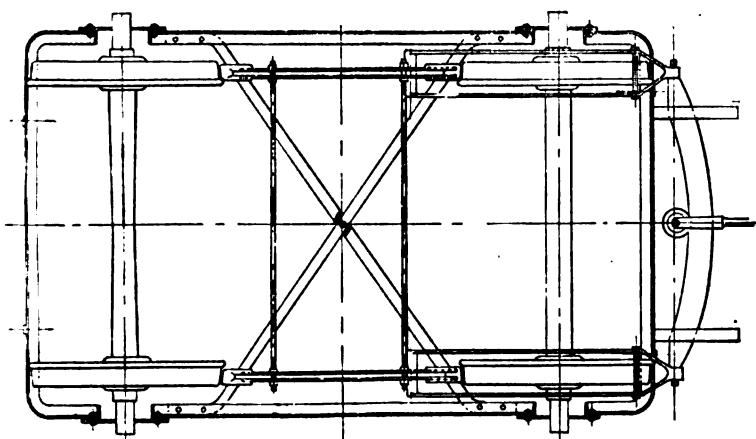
Method of Strengthening Truck (Angle Steel Under Frame).
